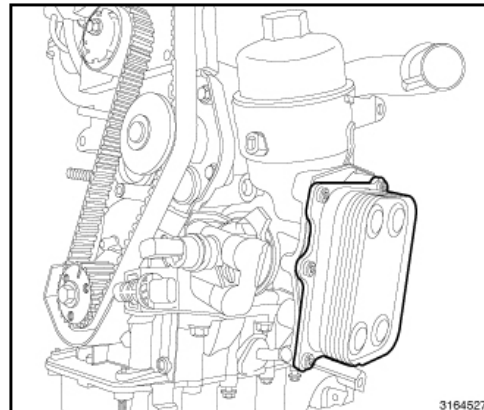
FIRE Engine Oil Heat Exchanger Location
